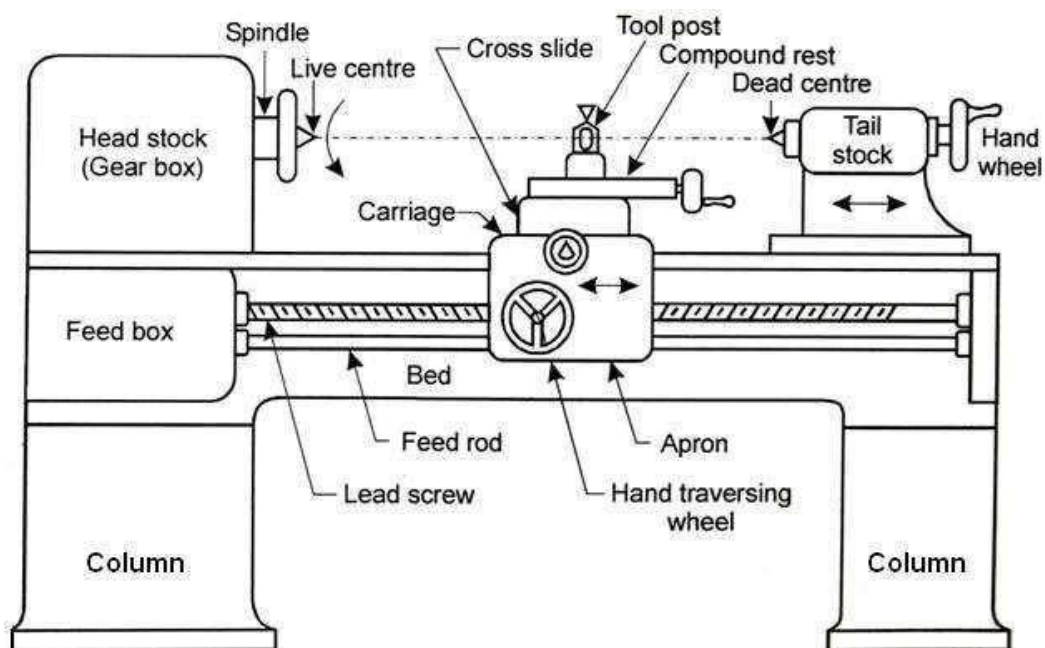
shows the basic configuration of a center lathe. The major parts are:
